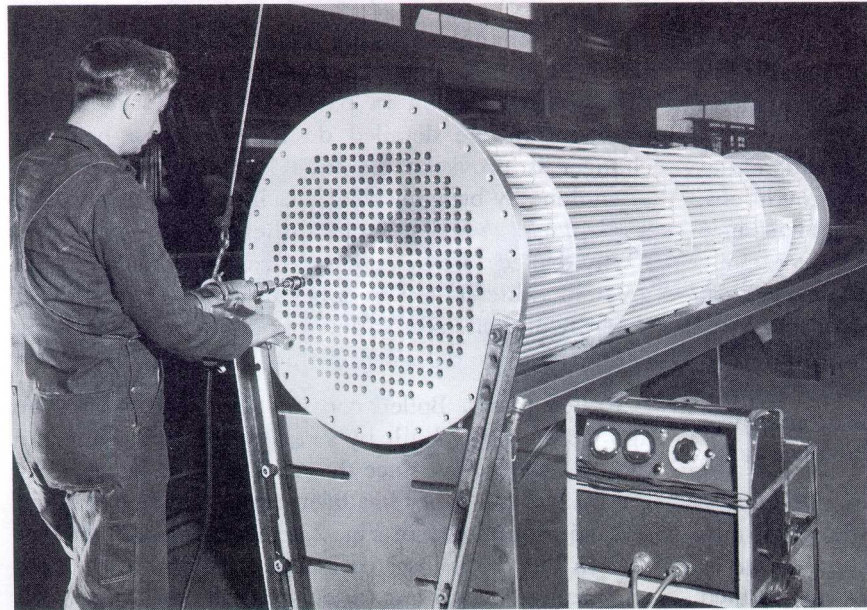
Photo showing tubes being rolled into the header sheet of a shell-and-tube heat exchanger. (Courtesy Patterson-Kelley Co.)
